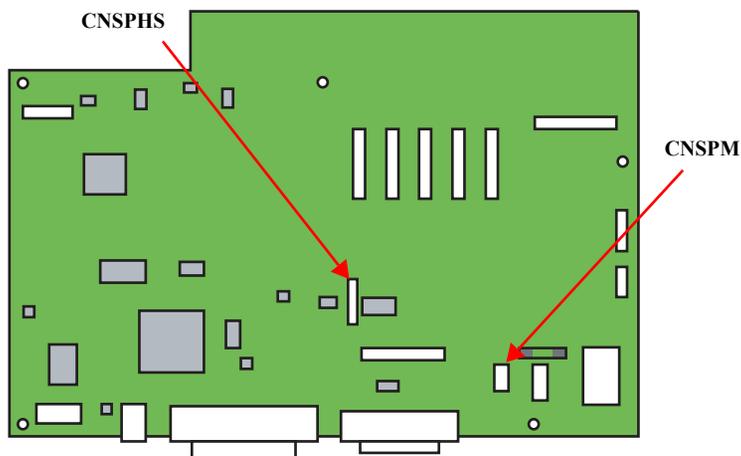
SP MOTOR ASY connectors on the ROM BOARD
